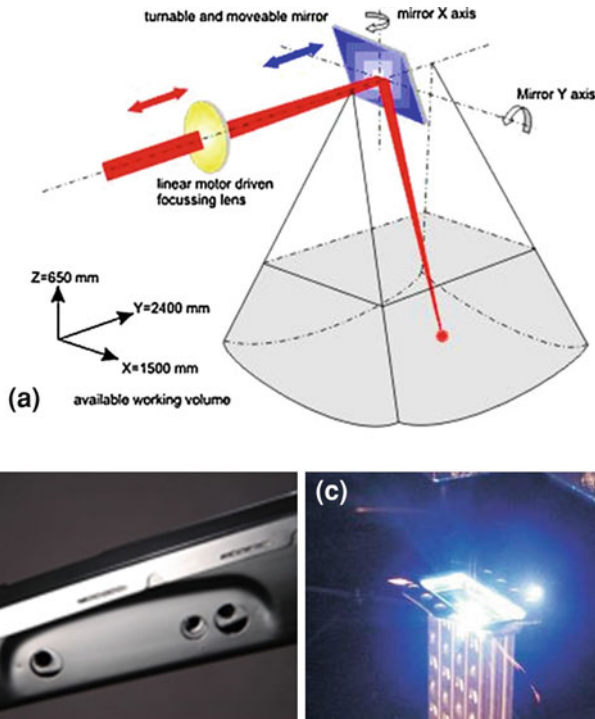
Remote laser welding: a Schematic of the process [47], b laser stitch welding door assembly, and c tube to end plate welding in a heat exchanger
